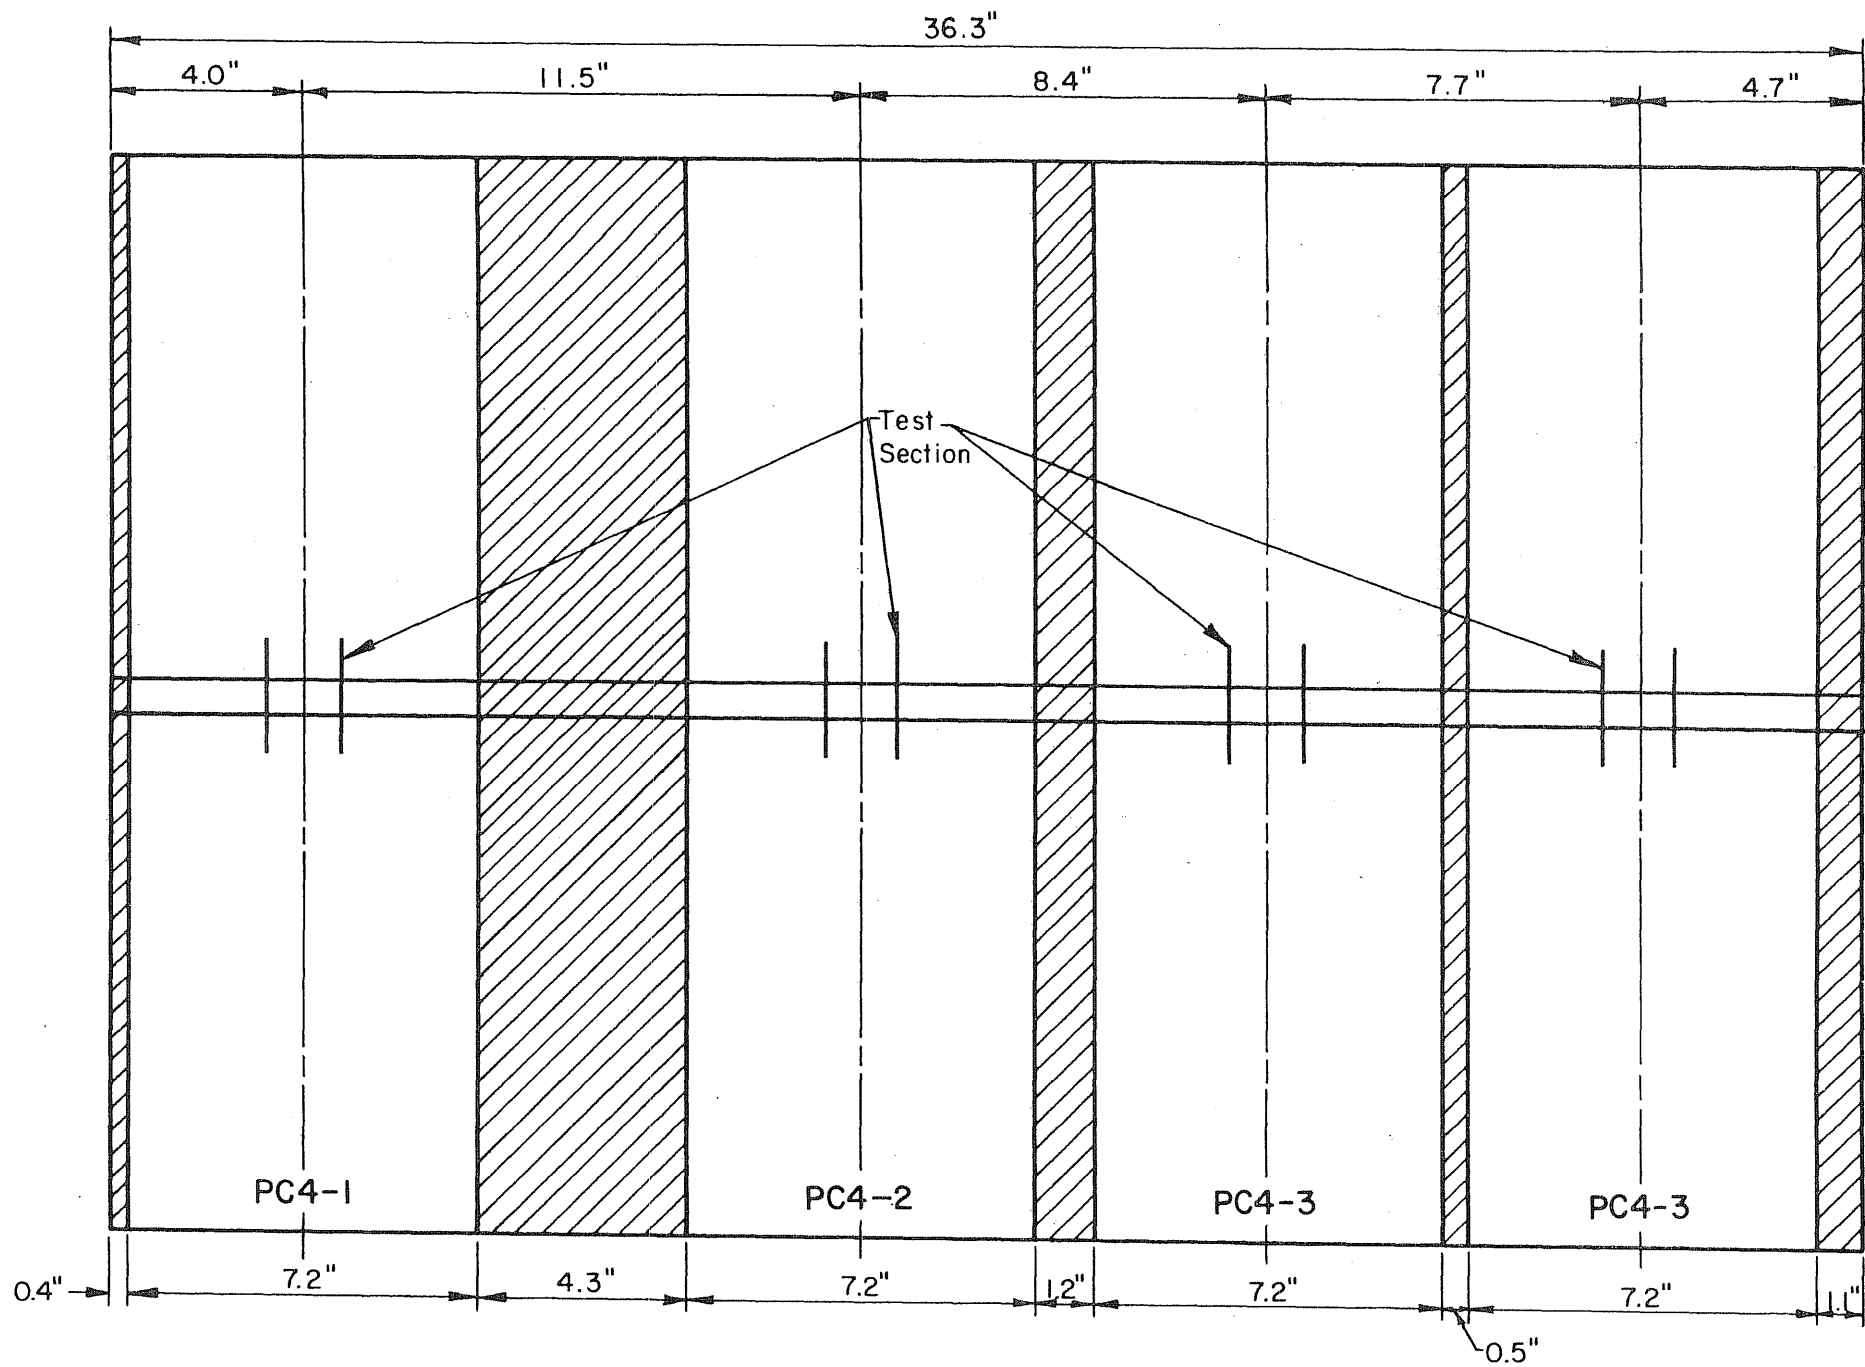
LOCATIONS FOR CUTTING OF TEST SPECIMENS FROM WELDED PLATE NO. 4
